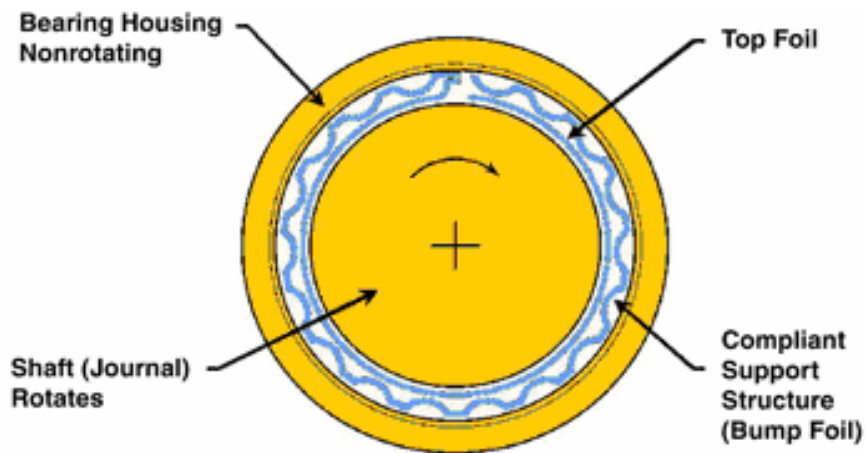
Schematic view of foil gas bearing, source from [3]
